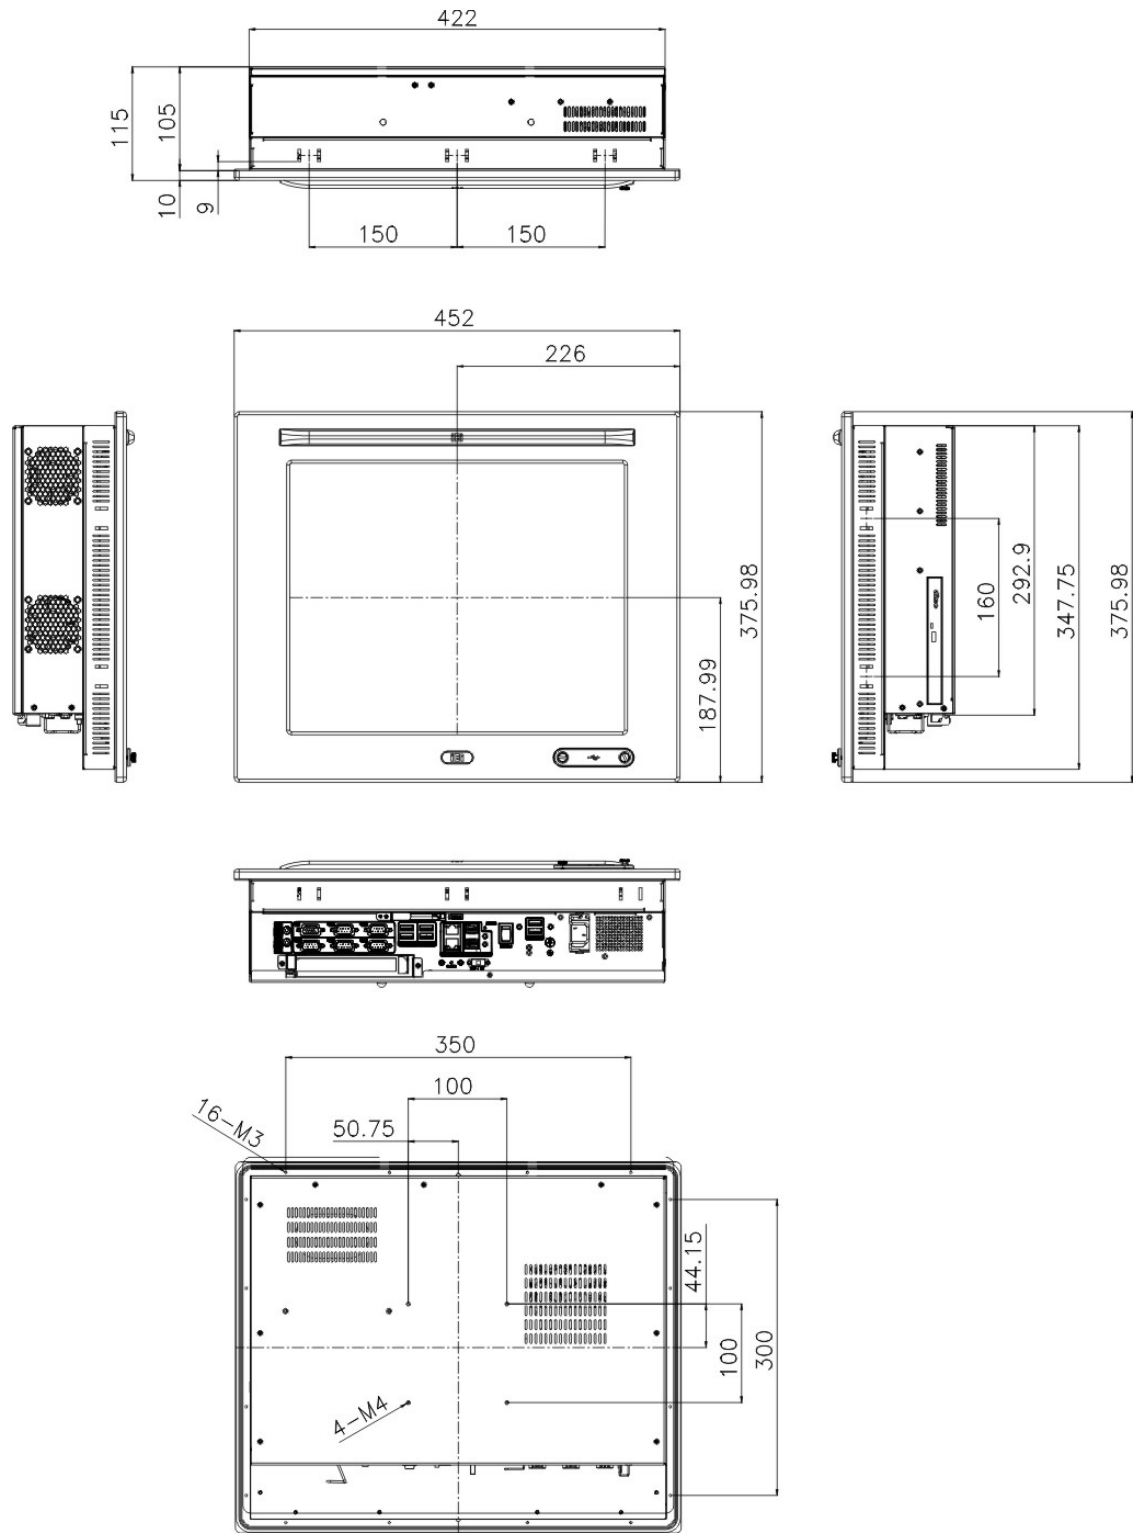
WIDS-517A-H61 Dimensions (mm)
